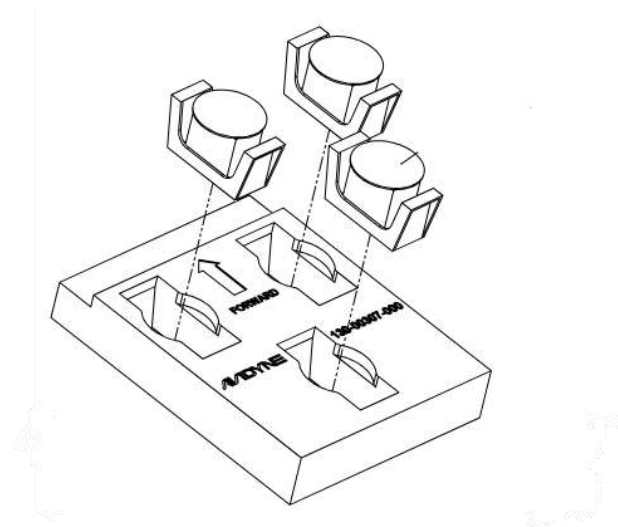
Loading the Threaded Standoffs into the Locator Tool
